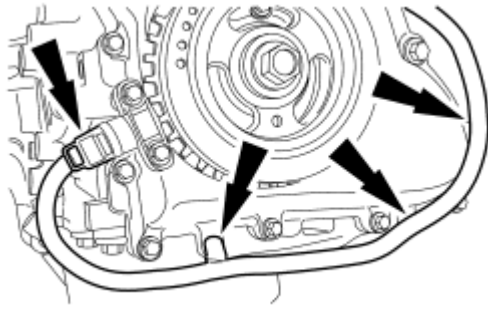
Locating Crankshaft Position Sensor And Wiring Harness Pin-Type Retainers
